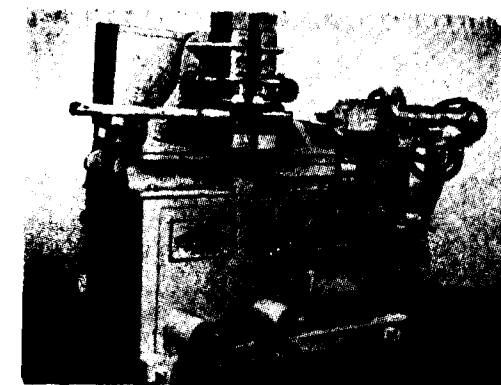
A-1 Automatic Flash-Butt Welder With Tube Stripper.
